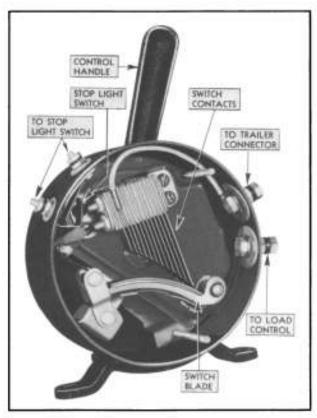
View of Trailer Electric Brake Control with Cover Removed
